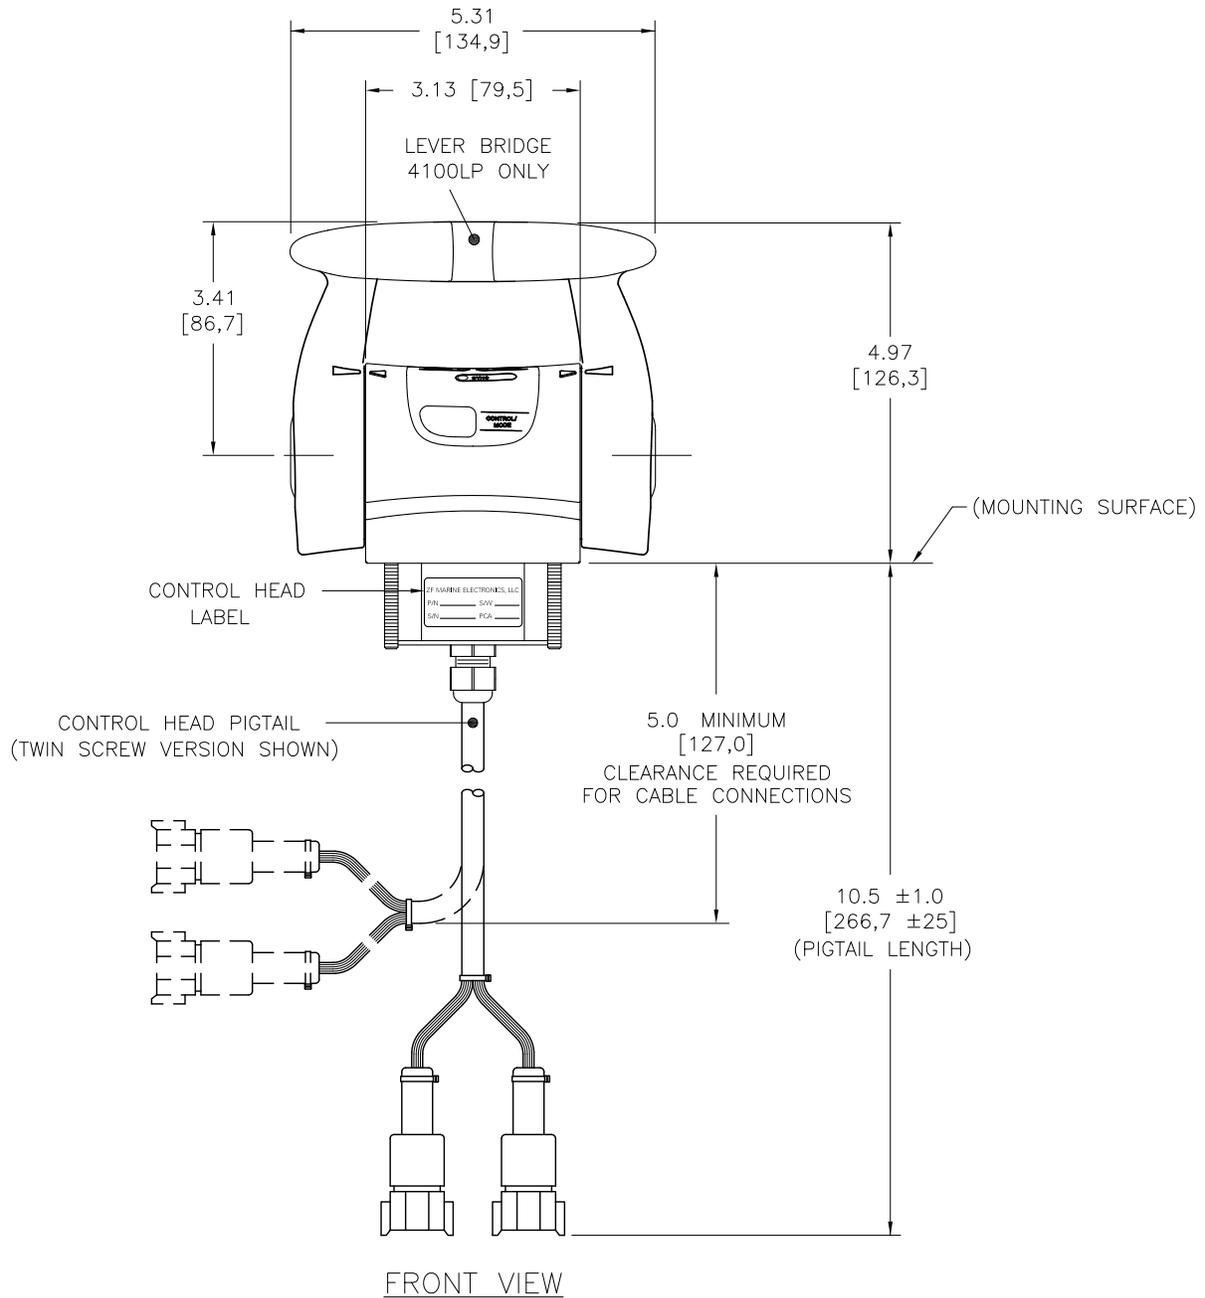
4100LP Control Head – Front View Dwg #13932ART-8
